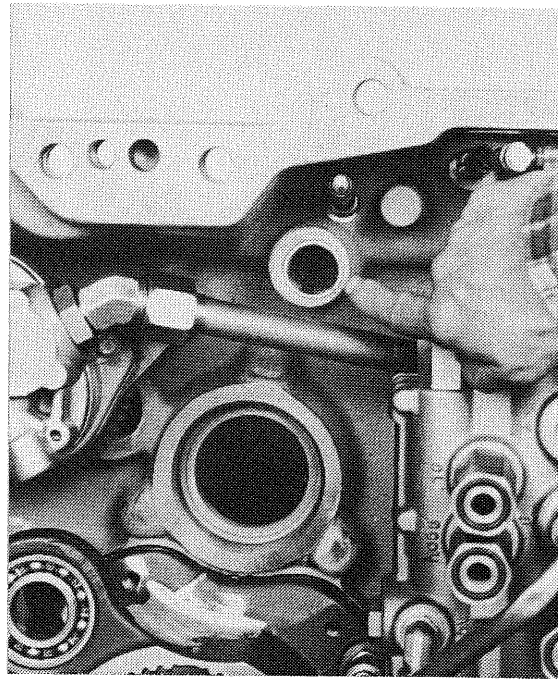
Assembly of the PFR Clutch (5 of 5)
